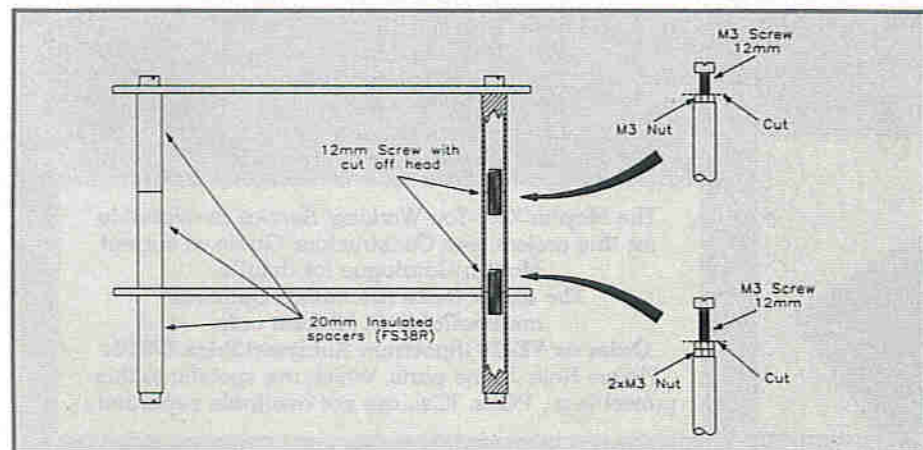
Assembling the Filter and Multiplexer PCBs together.
